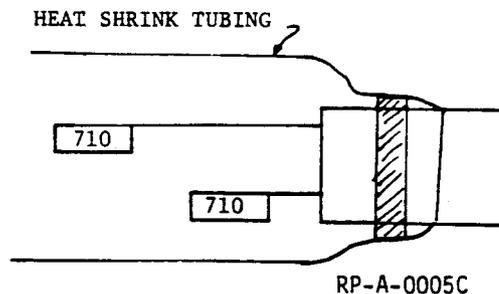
TUBING SHRUNK ONLY OVER ADHESIVE AND SHEATH (PAR. 5.1.2.2G)
